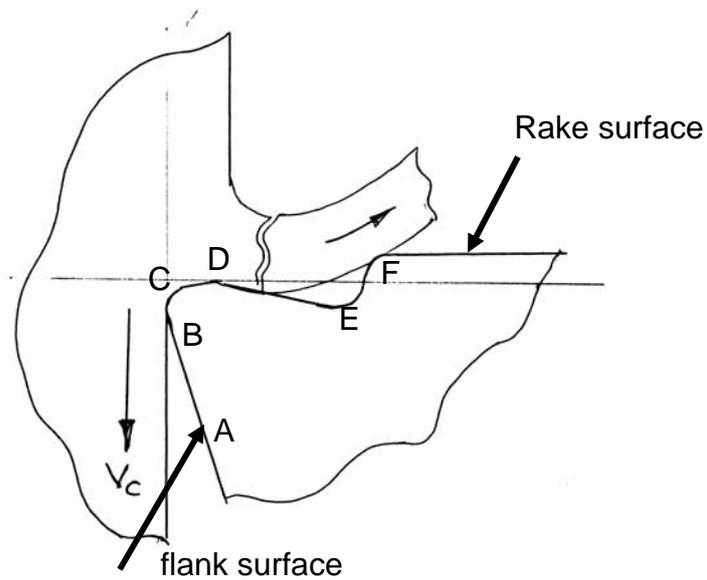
Schematic view of the typical form of inserts (cutting edge) with integrated chip-breaker.
